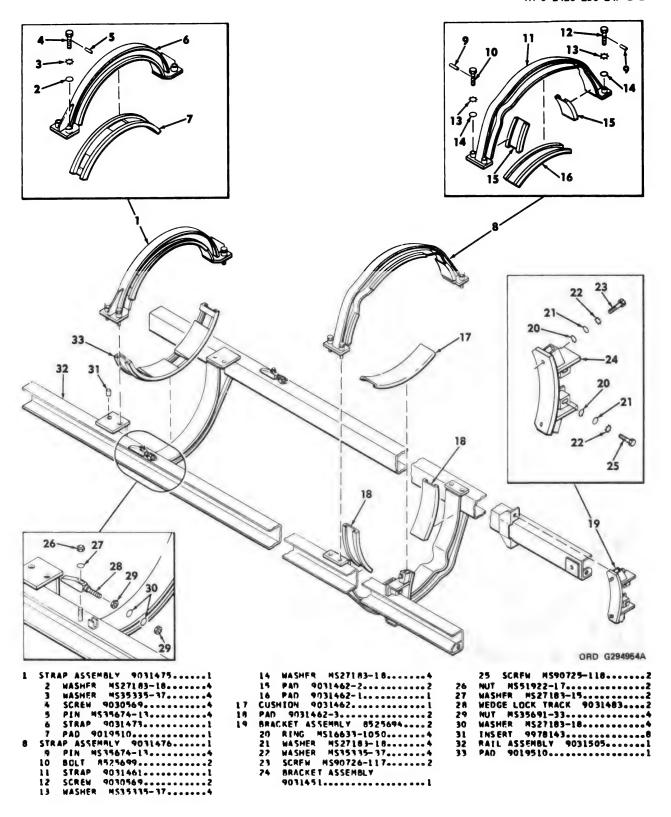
TRACK ASSEMBLY, MOVABLE, AFT BODY /9031499/ /SEE FIGURE 126 FOR NEXT HIGHER ASSEMBLY/
